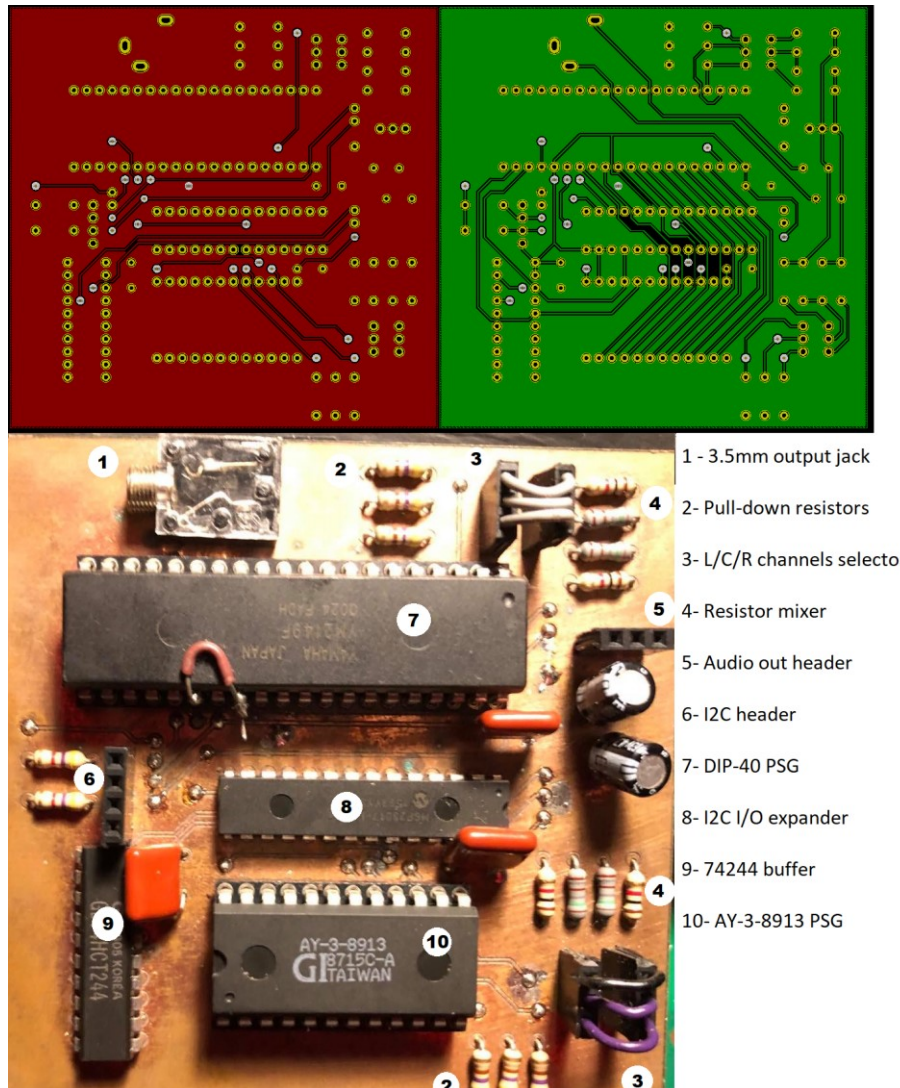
Back and front view of the PCB design (top) and populated board (bottom).
